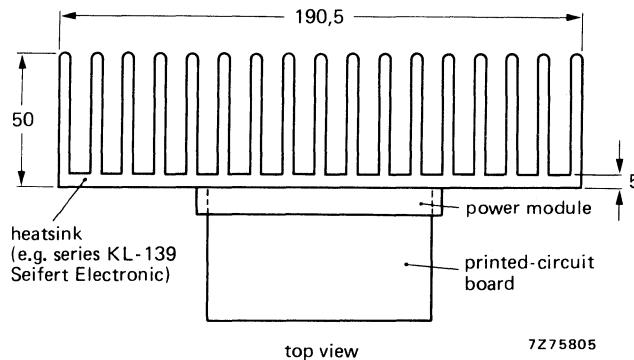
Example of a heatsink to be used for the module; dimensions in mm.
